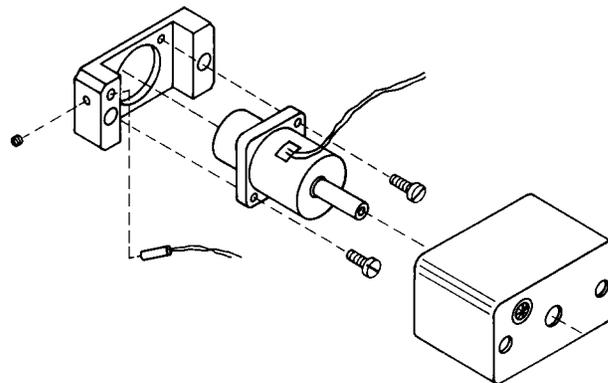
Redesign of motor-drive assembly following design-for-assembly analysis
